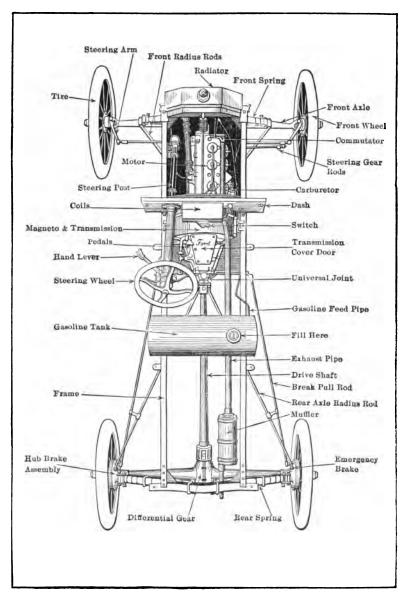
Plain View of the Ford Chassis Showing Relative Location of Important Components.
